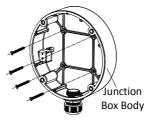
Secure the Junction Box's Body on Wall /Ceiling
